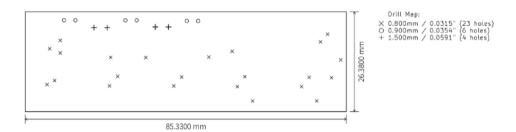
Fabrication drawing (drill drawing view) of the Main Power module.
